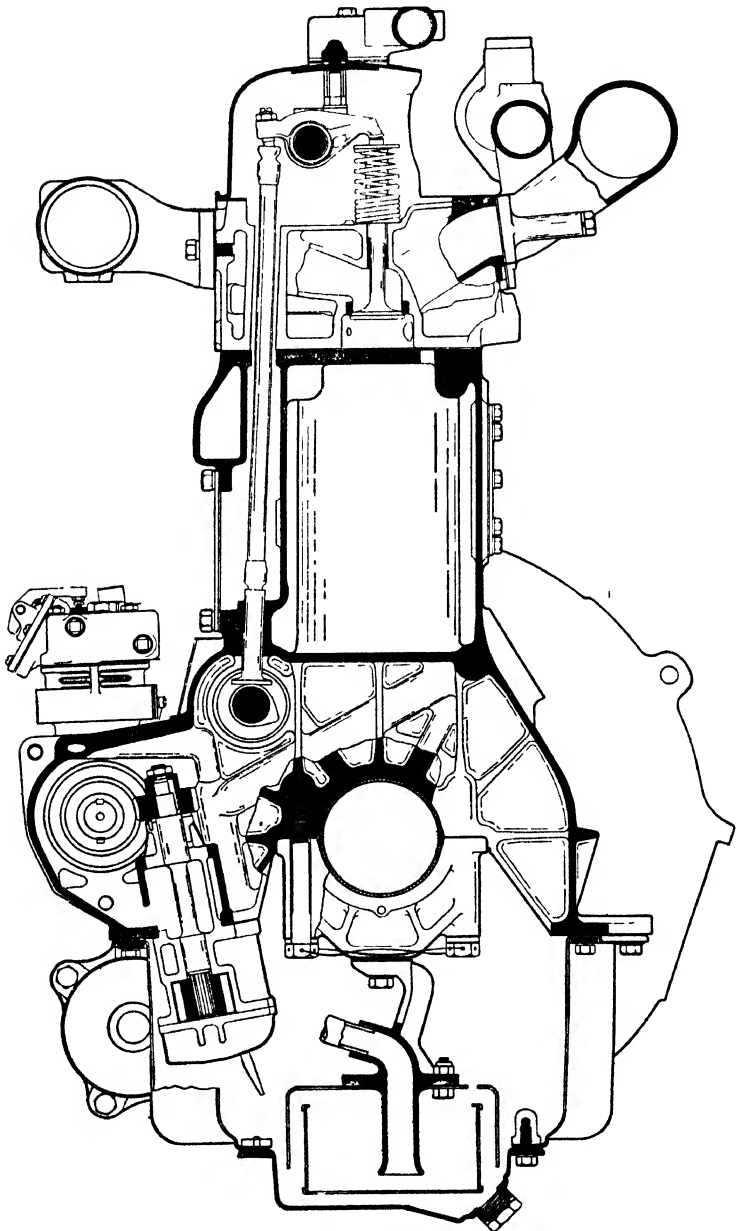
CROSS SECTION OF MACK-LANOVA ENGINE.
